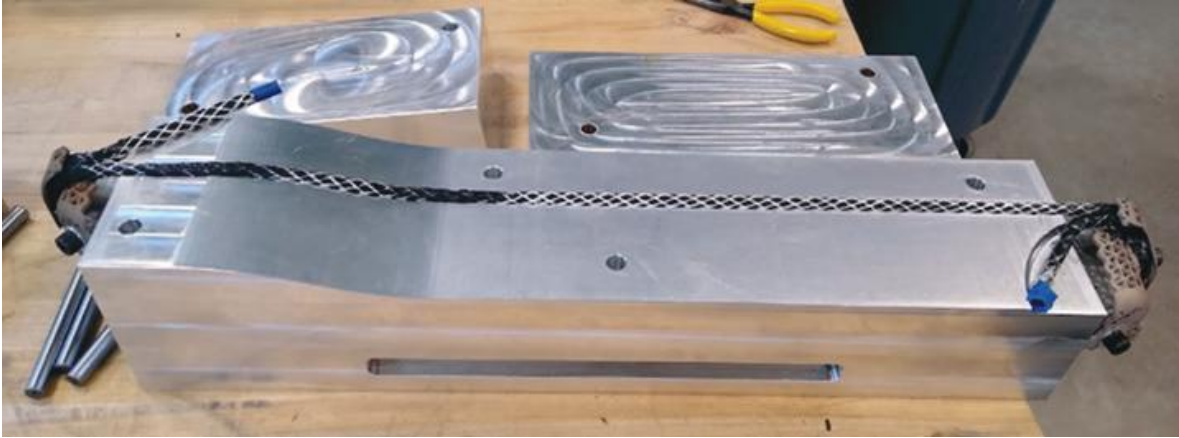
Jig design to form M-TOW into AM attachment points. Source: Ford Motor Company.
